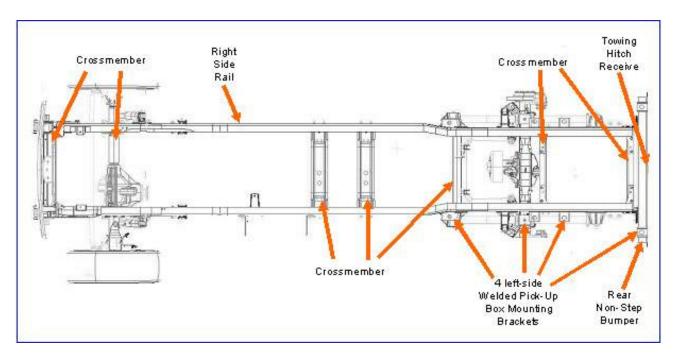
Plan View of Frame Rails, Crossmembers, and Pick-Up Box Mounting Brackets; with Rear Non-Step Bumper
